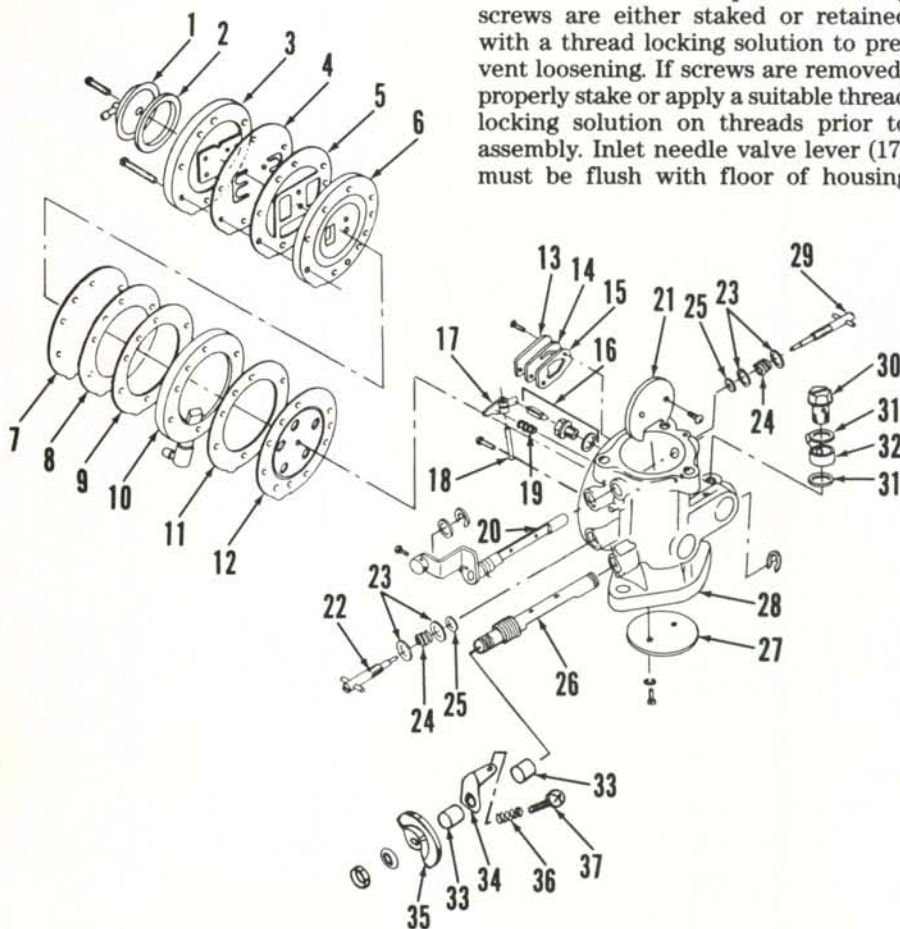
Exploded view of Mikuni type BN34 diaphragm carburetor used on all models.
